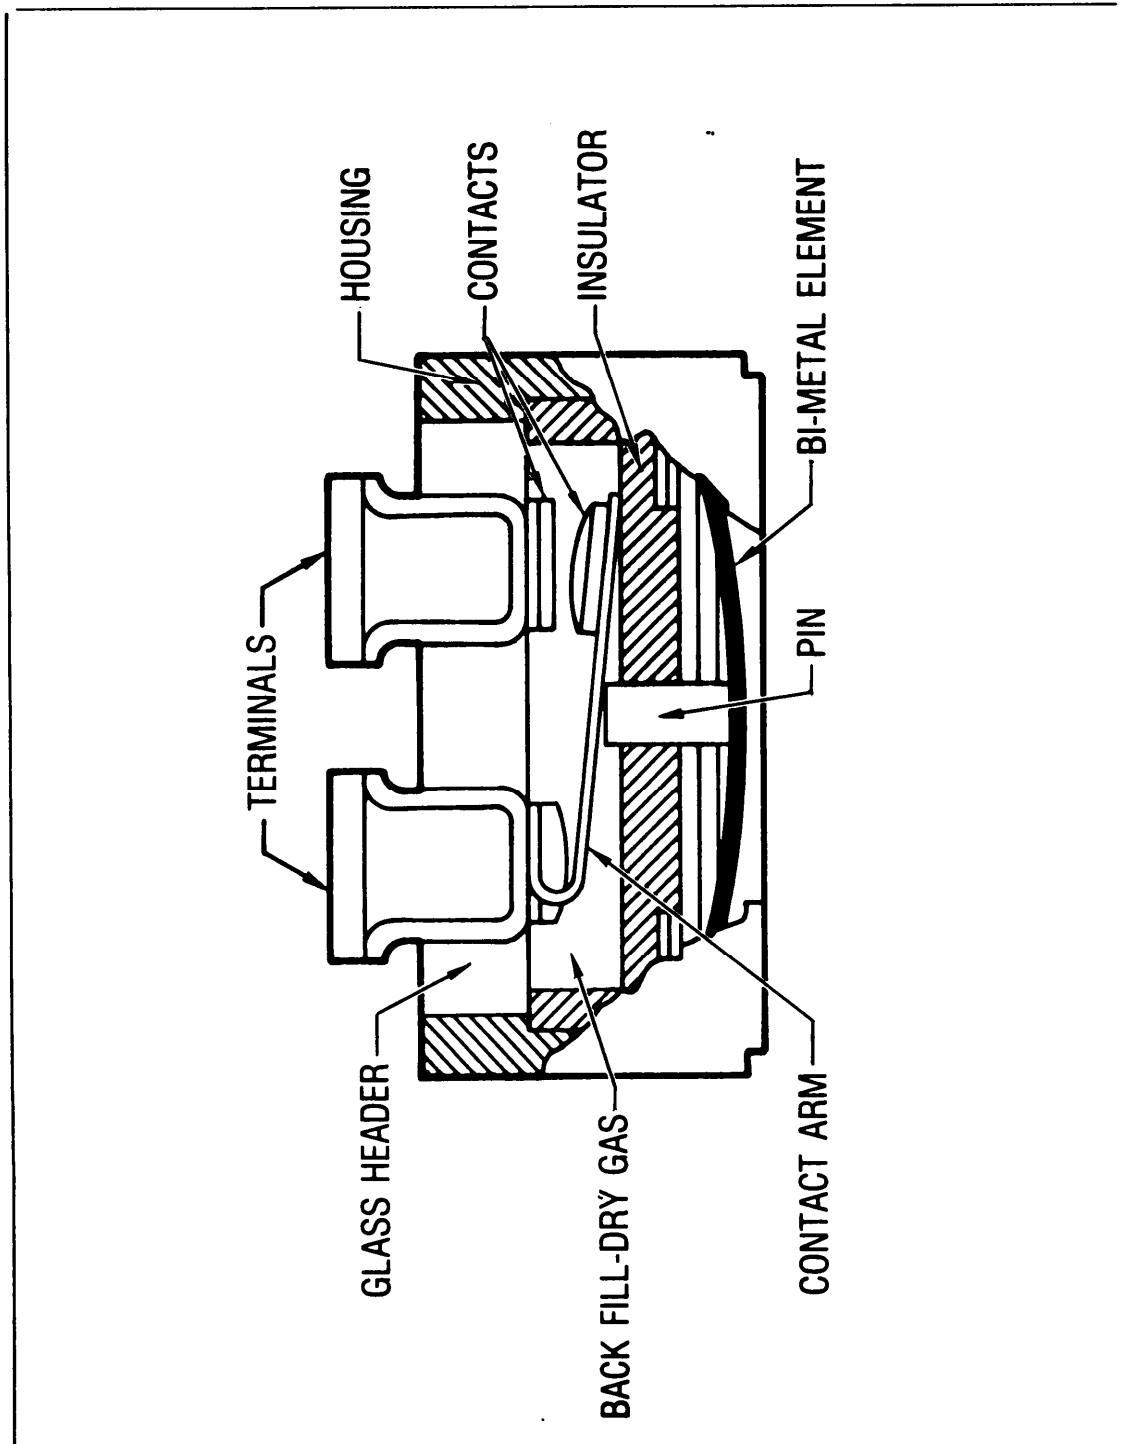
Type A Thermal Switch Cross-sectional View.
